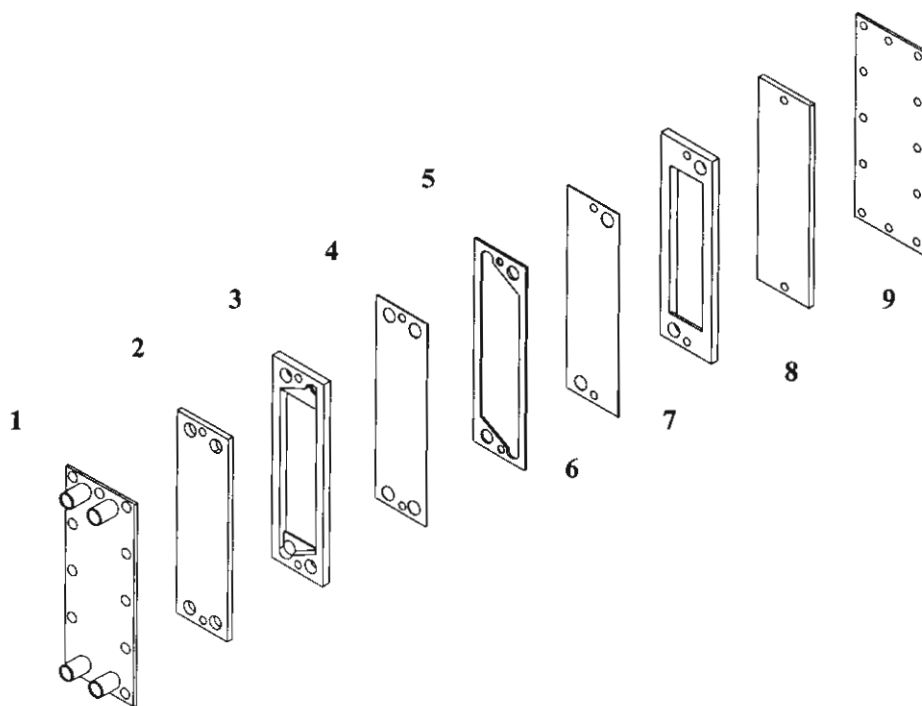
Plate arrangement within the test section (Plate No. 1-9)
